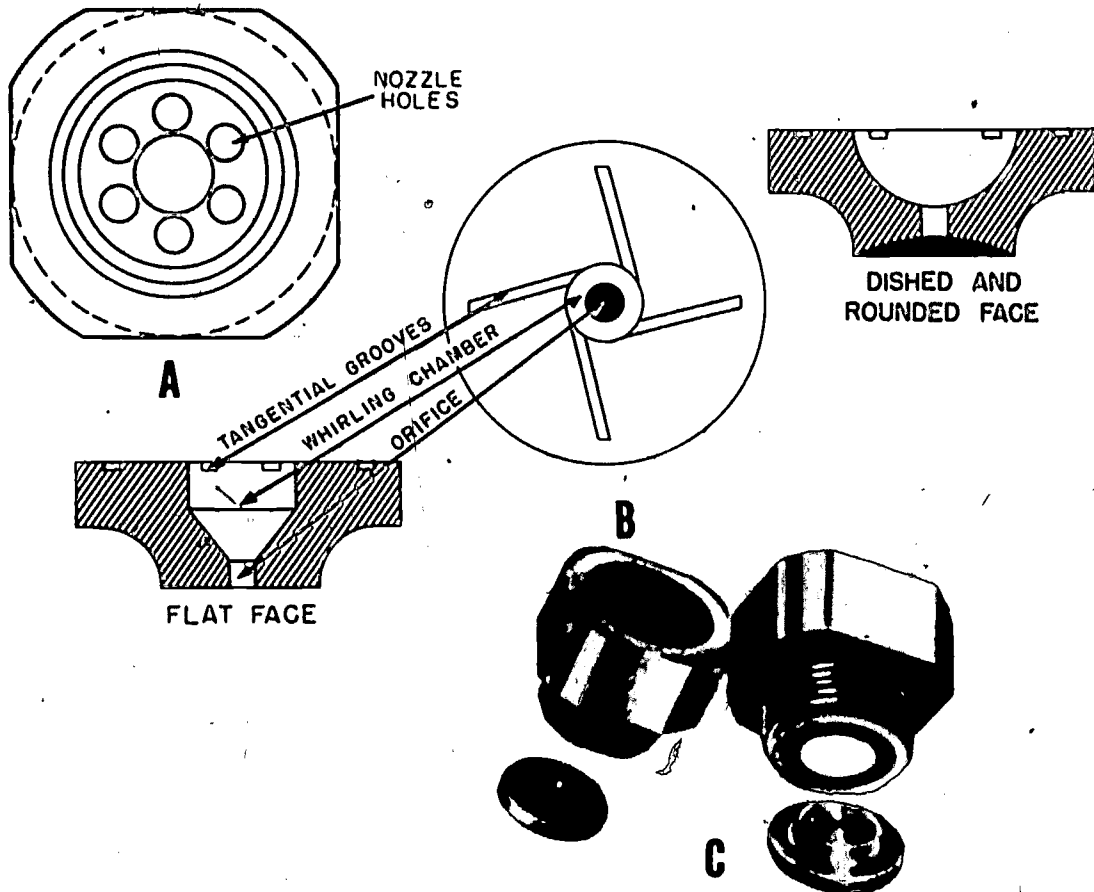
Nozzle and sprayer plate showing holes, groove and whirling chamber.
